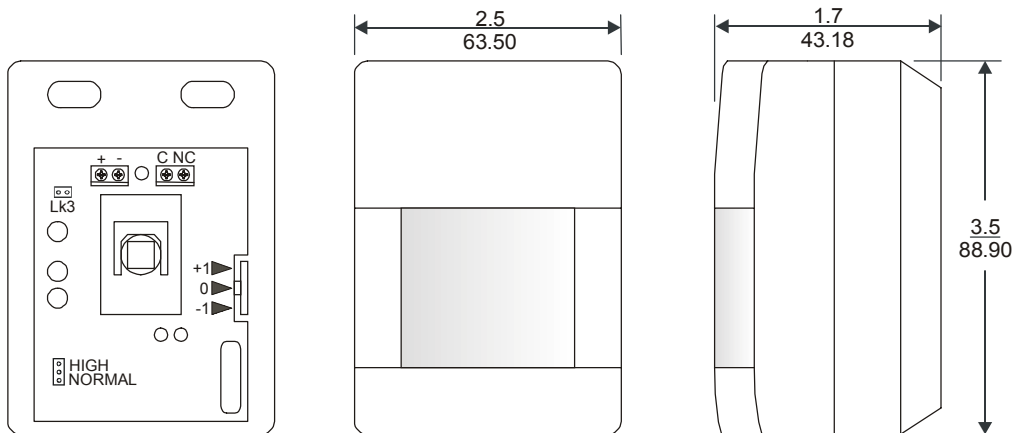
MRC19-PIRW Wiring Connections and Dimensions, in. (mm)
